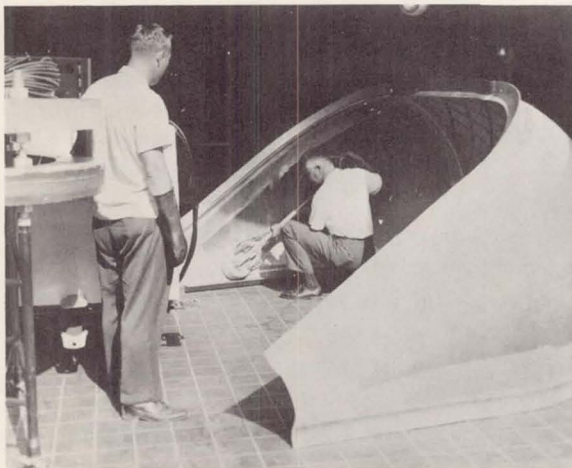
Magnetic hammer. (Marshall Space Flight Center.)
